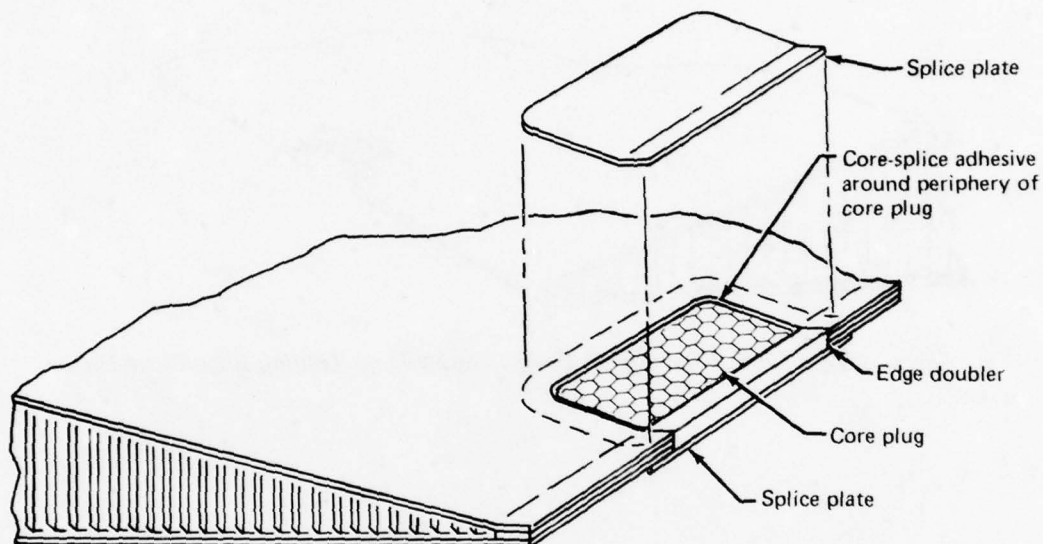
Assembly With Lower Splice Plate, Core Plug, and Edge Doubler in Place
